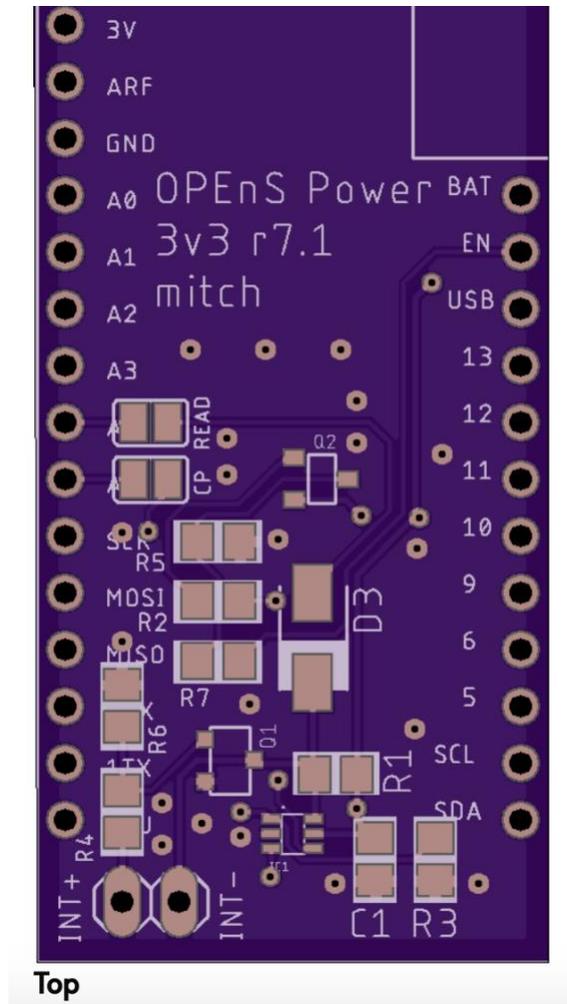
Top view of board after submitting to OSHPark for printing. Before operating, the CP and READ jumpers should be bridged with solder.
